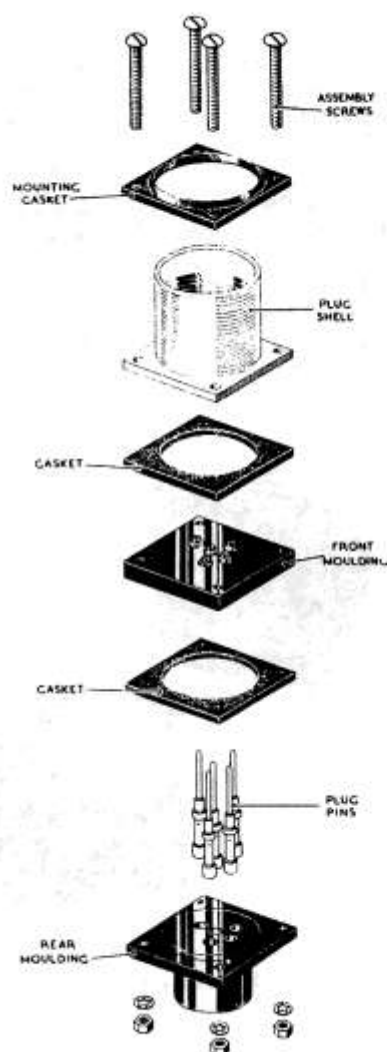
EXPLODED VIEW OF CLIMATIC-PROOF PLUG
